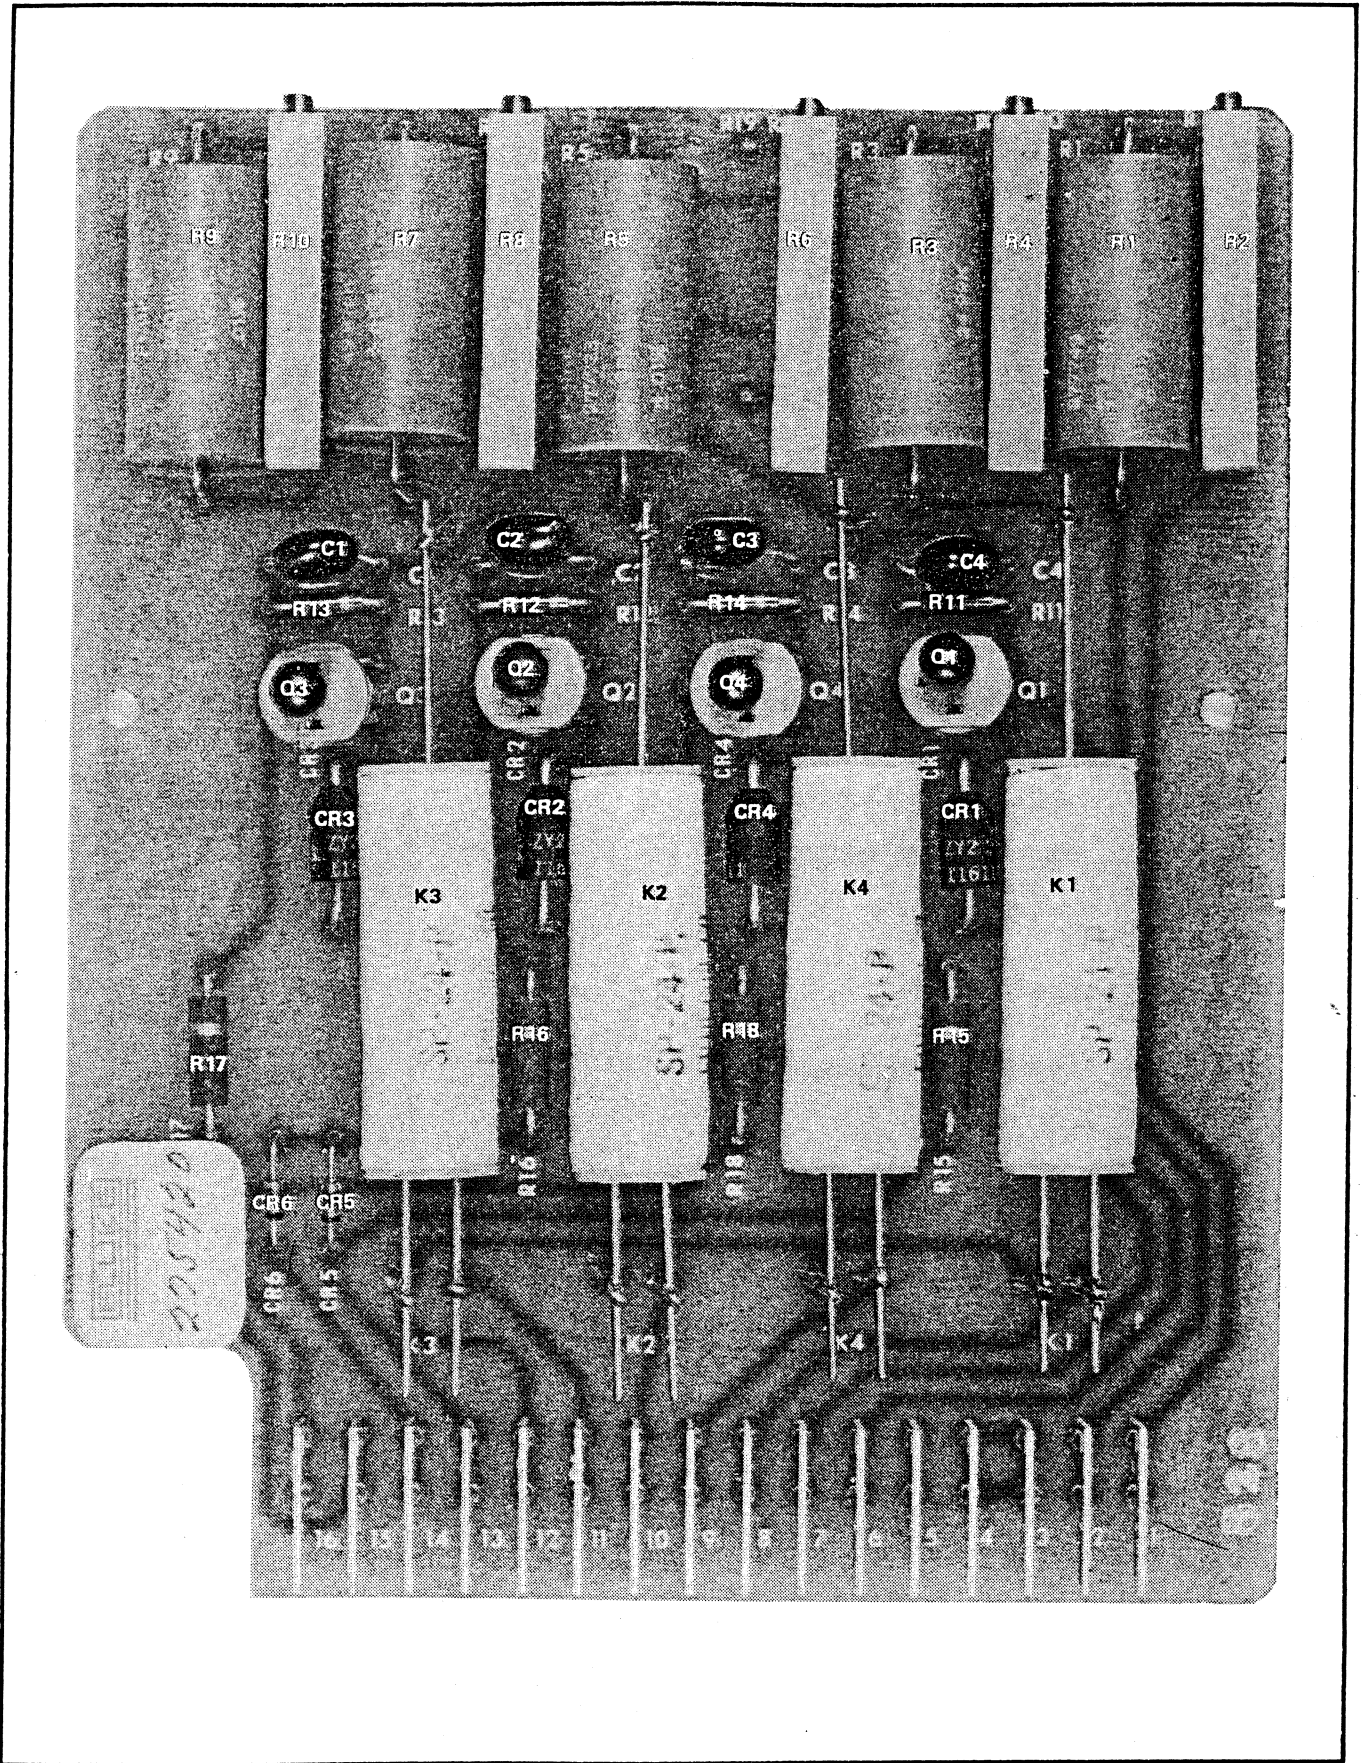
LADDER DRIVER NO. 2 AND NO. 3 ASSEMBLY
